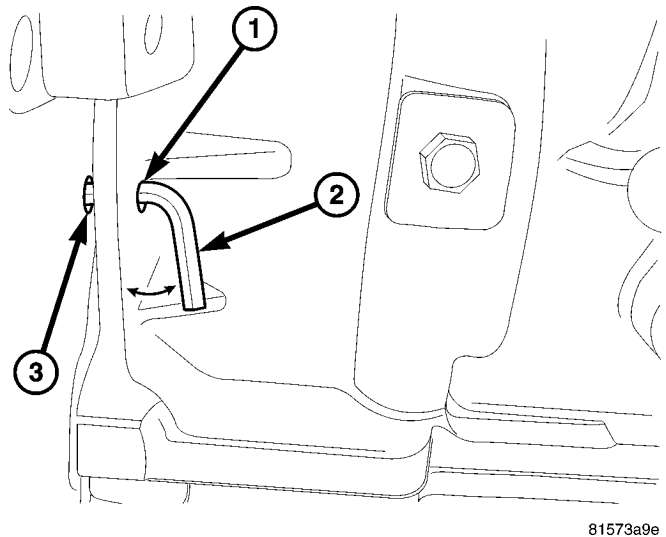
FLYWHEEL ALIGNMENT HOLE LOW
